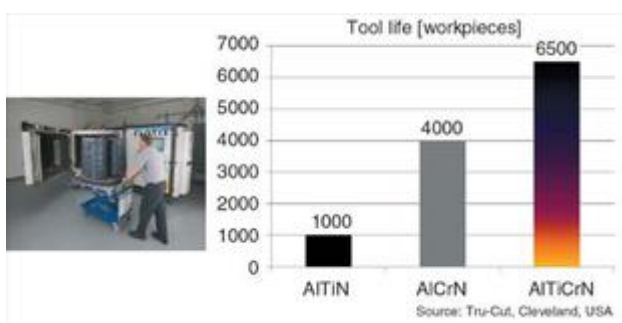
Sawing with AlTiCrN coated tool: material, steel plates 4140, H13, S7, D2, A2, tools; carbide tipped saw blades 22" \times 70", $n = 42$ /min, $v_c = 242$ m/min, emulsion.
